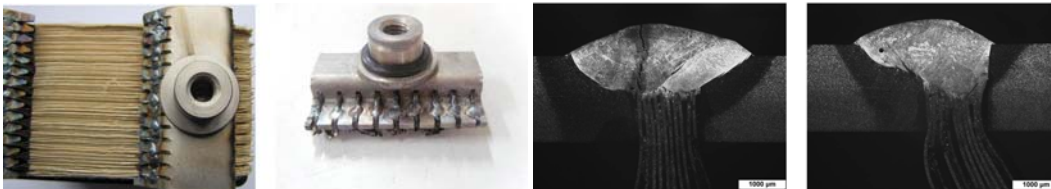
Welding cross-section area of argon arc welding
